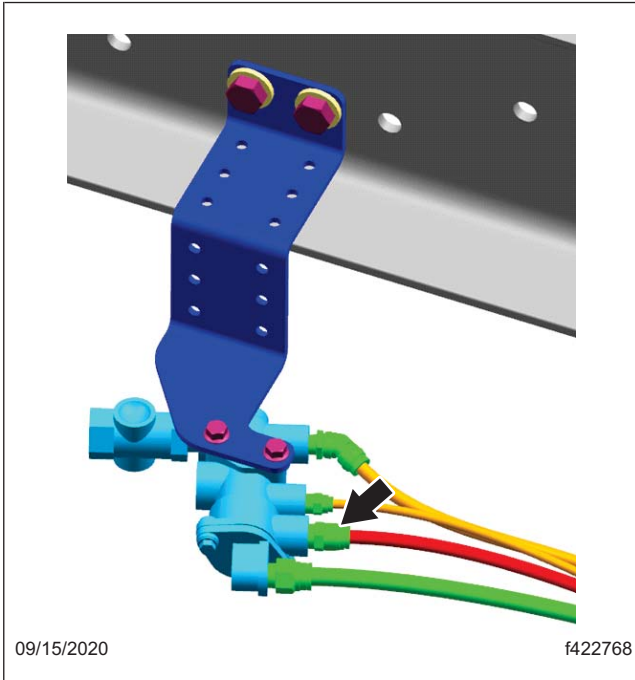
, Removing the Red #8 Hose from the Fitting, Tractor Protection Valve
